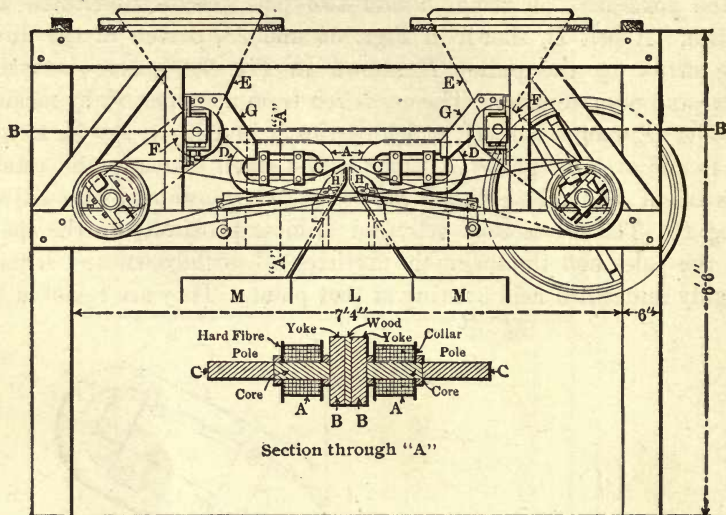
SECTION OF POLE PIECES OF WETHERILL MAGNETIC SEPARATOR.
